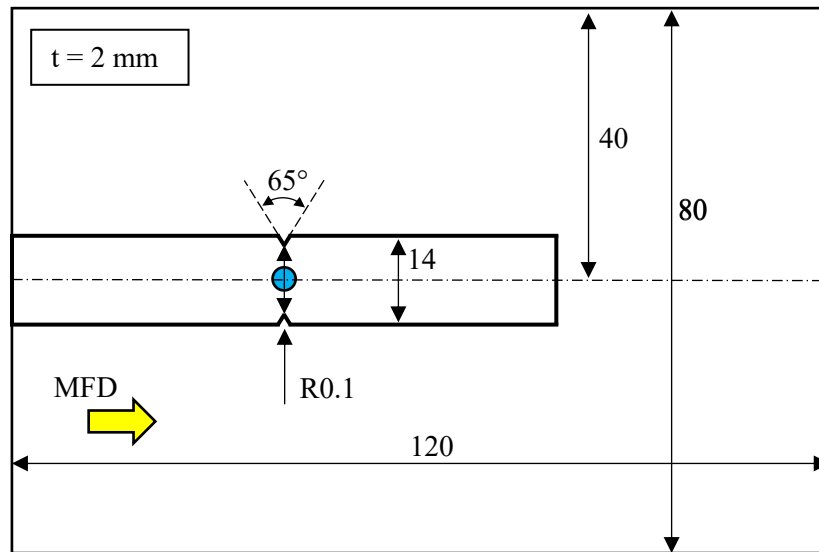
Geometry N/A. Specimen and plate dimensions.
